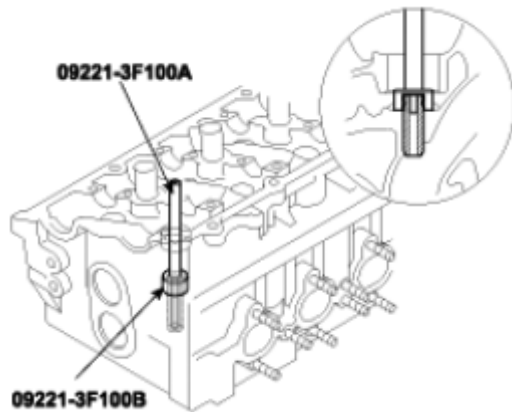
Installing Valve Guide Using SST (09221-3F100A)
